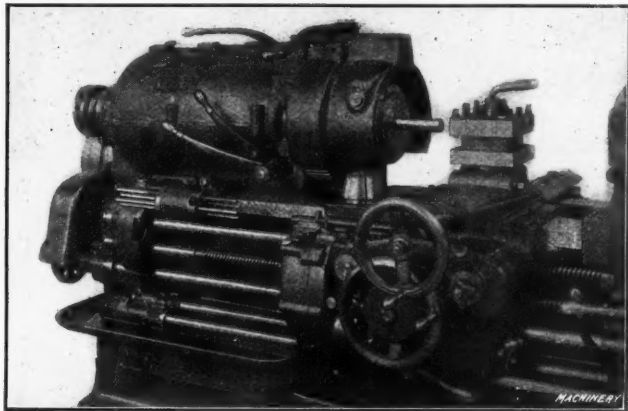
Libby Turret Lathe with the New Collet Chuck in Position
